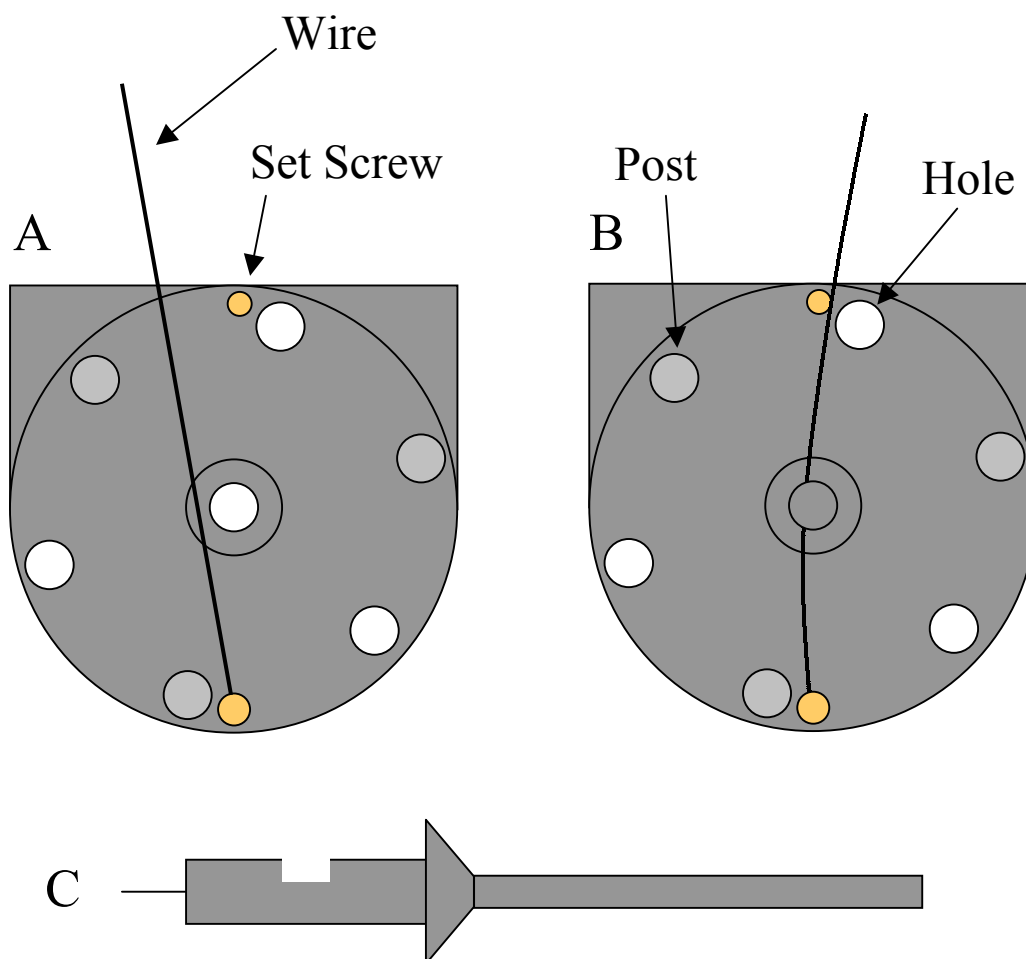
Tip exchanger (A & B) and tip holder (C). In position A, the tip holder is free to form a friction fit with the STM. In position B, the wire is caught in the groove on the tip holder, keeping the tip holder on the tip exchanger.
